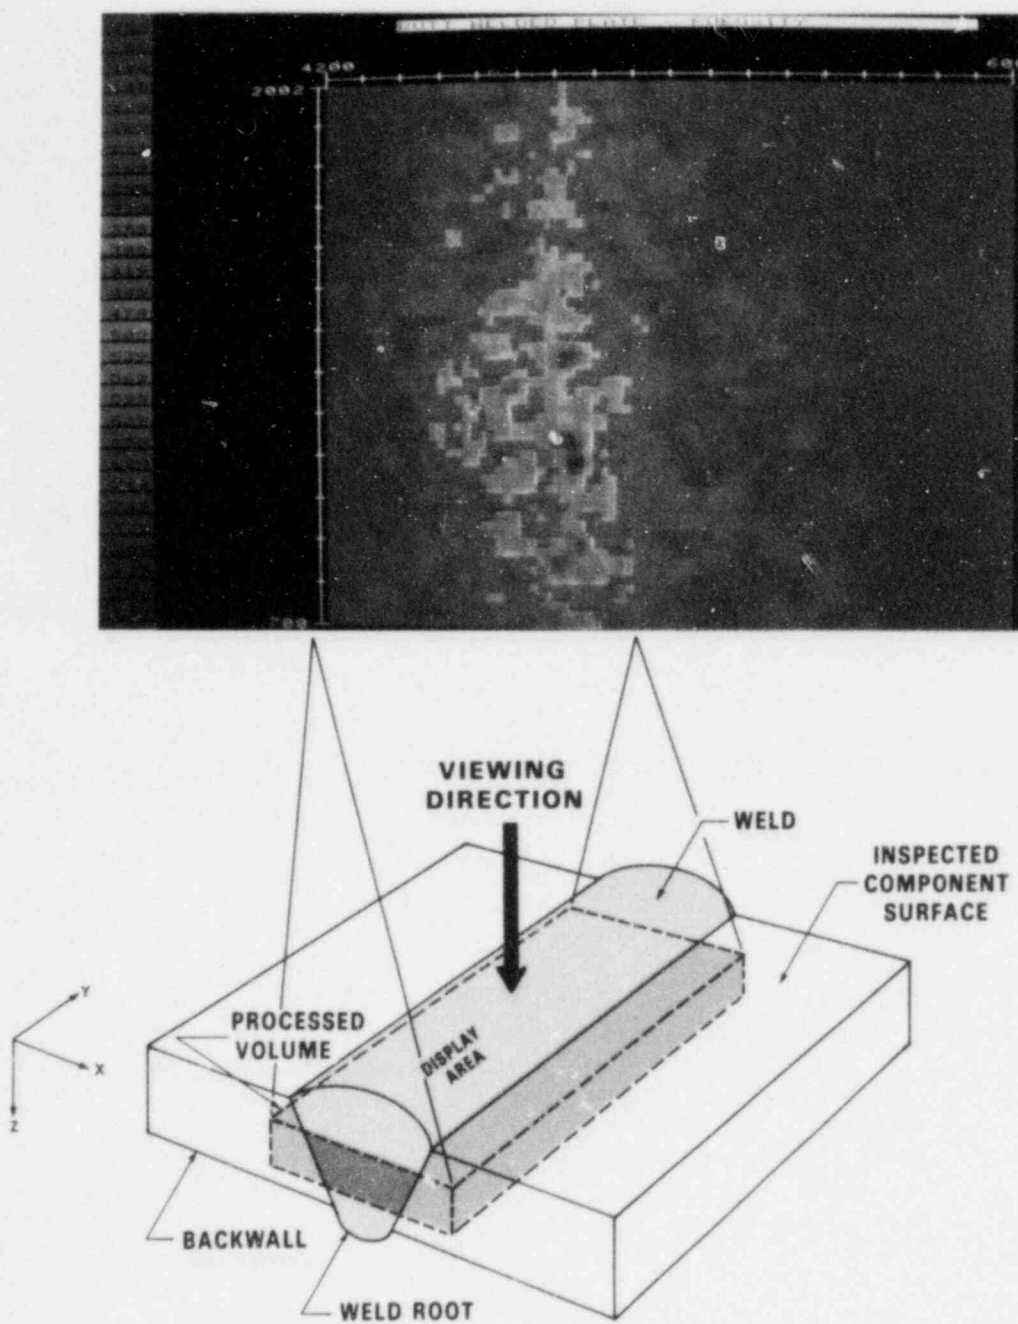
BUTT-WELDED CARBON STEEL PLATE SPECIMEN - POROSITY SECTION
